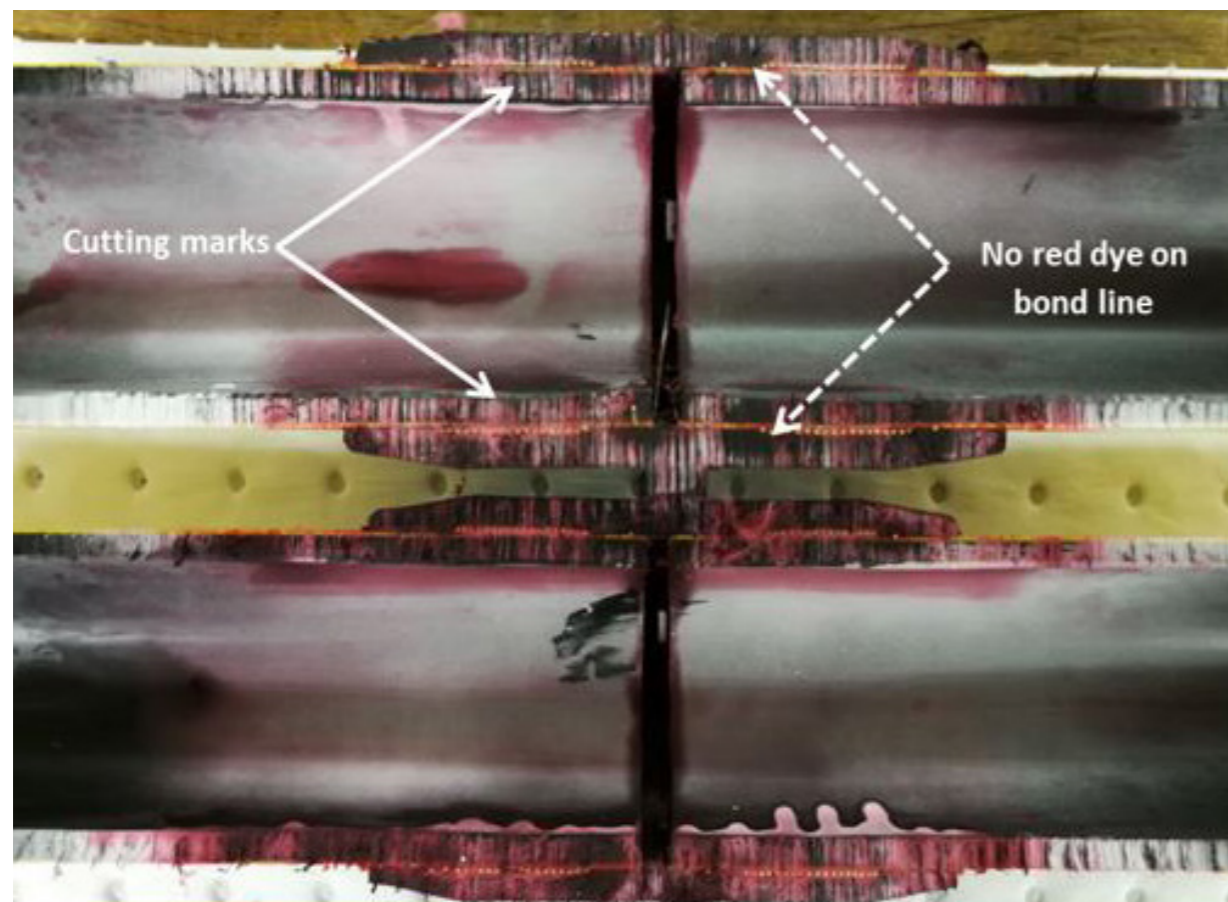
Sectioned view of electrofusion welded hydrogen PE pipe following hydrostatic testing.
